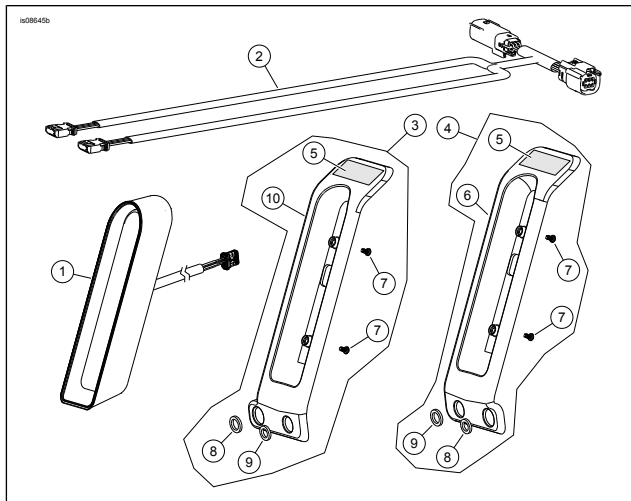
Service Parts: Run/Brake/Auxilliary Light Kit
